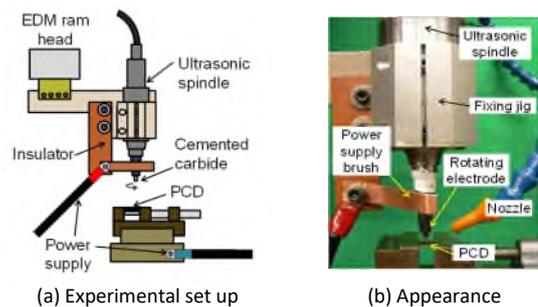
Blind hole machining to PCD by ultrasonic spindle
